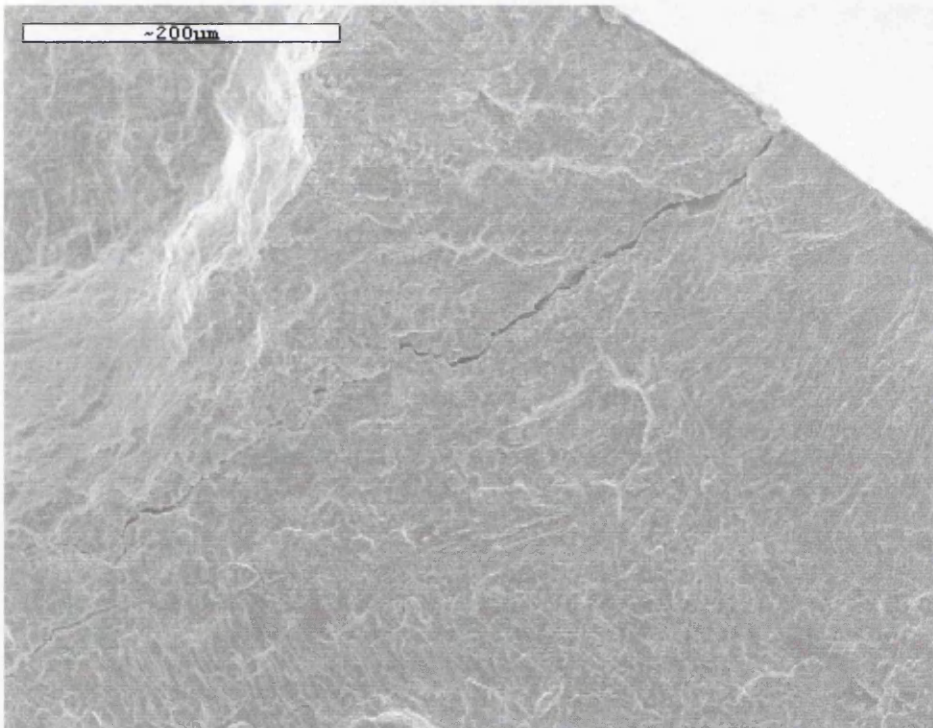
Strain control fracture surface (550°C, 2 min dwell in tension and compression), with sub-surface cracking
